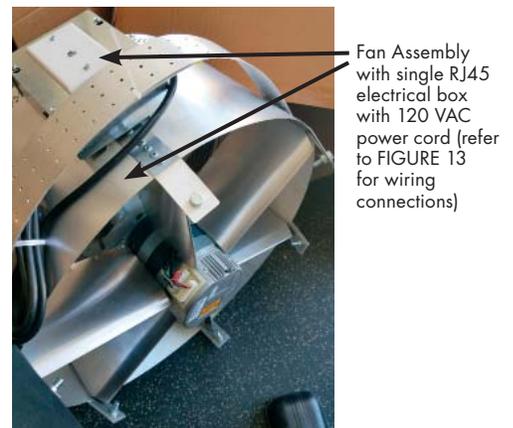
Fan Assembly for Remote Mount Electrical Control Box
